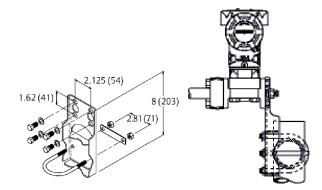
Panel Mounting Bracket Option Codes B2 and B8
